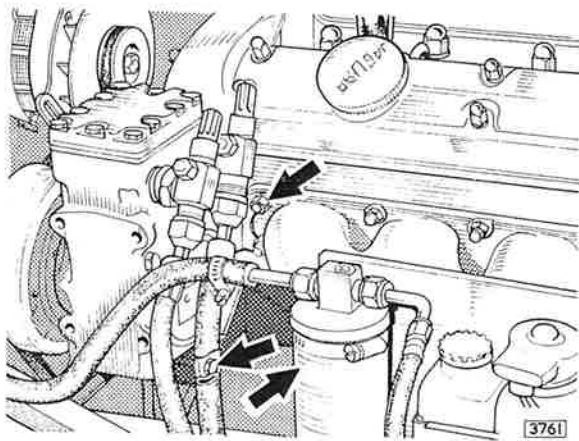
The compressor tie bracket and lower pivot mounting point.
